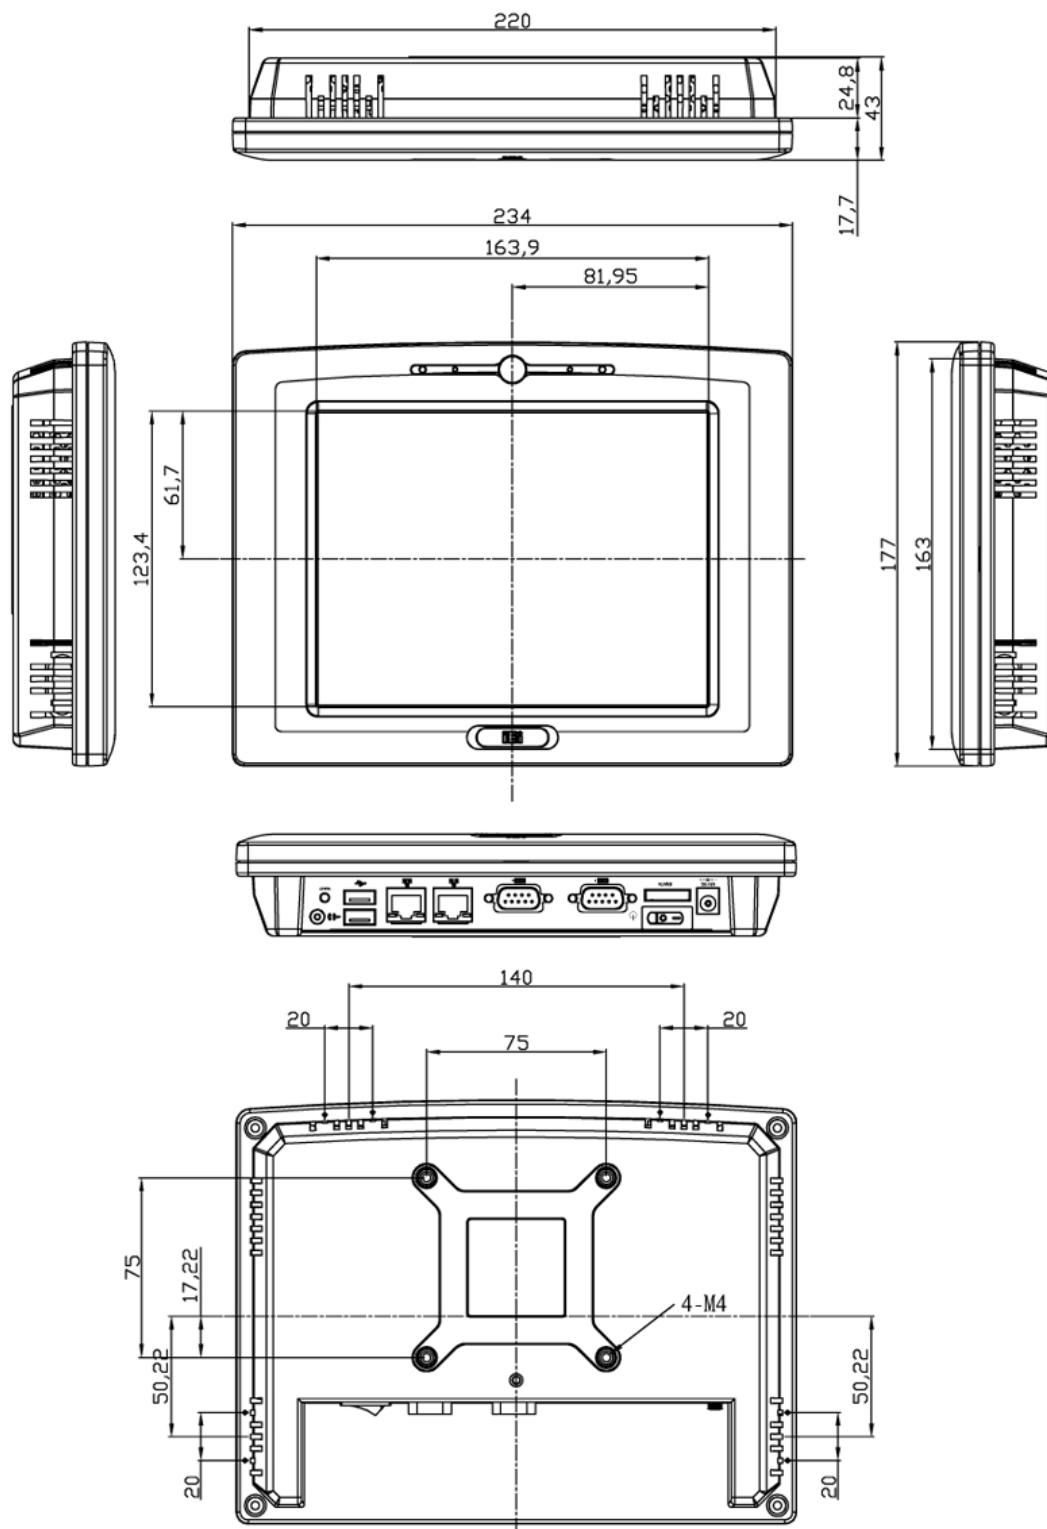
AFL-08B-N270 Dimensions (mm)
